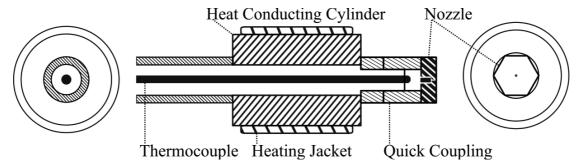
Schematic insight of the nozzle and its heating system; from left to right, rear view, longitudinal cross-section and front view.
